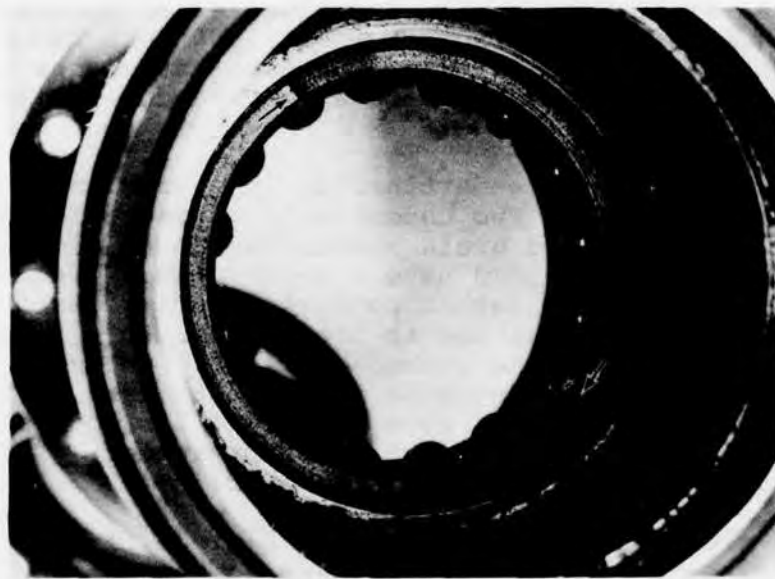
Inner Support Bearing, Task I Turbine Dynamic Load Test, Ramp-Roller Clutch.
